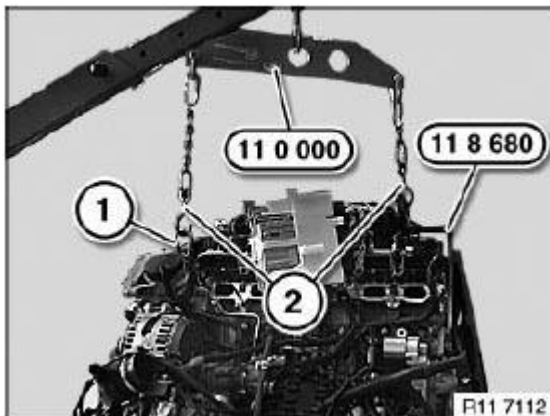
Identifying Special Tools 11 0 000 And 11 8 680 On Engine Crane
